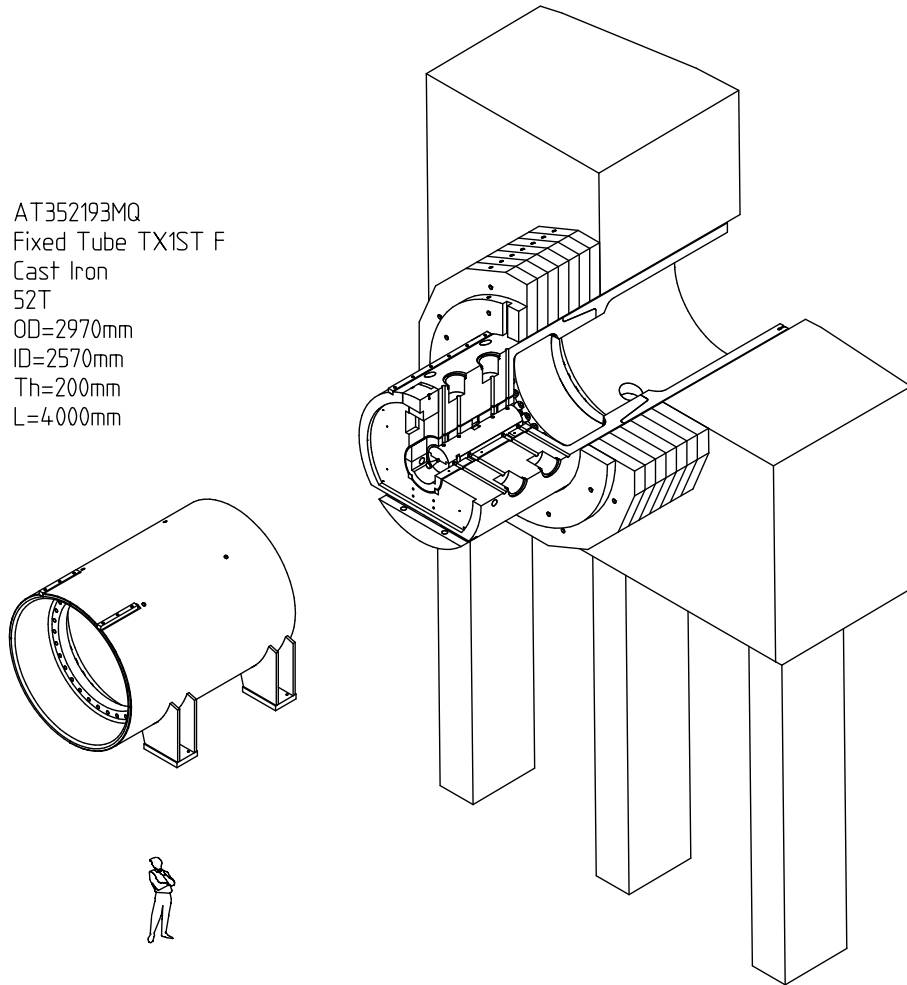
An extract from the drawing LHCTX1S\_0002 that shows the section of the UX15 inner shielding together with its fixed tube part.
